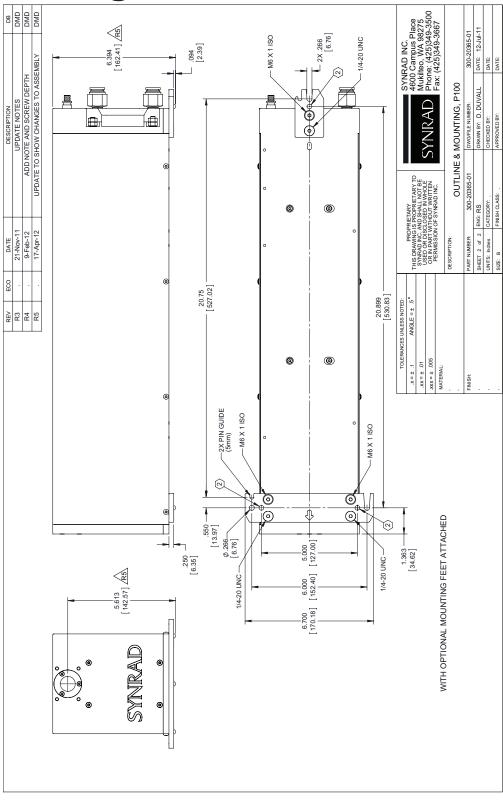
Pulstar p100 outline & mounting dimensions, sheet 2 of 2
